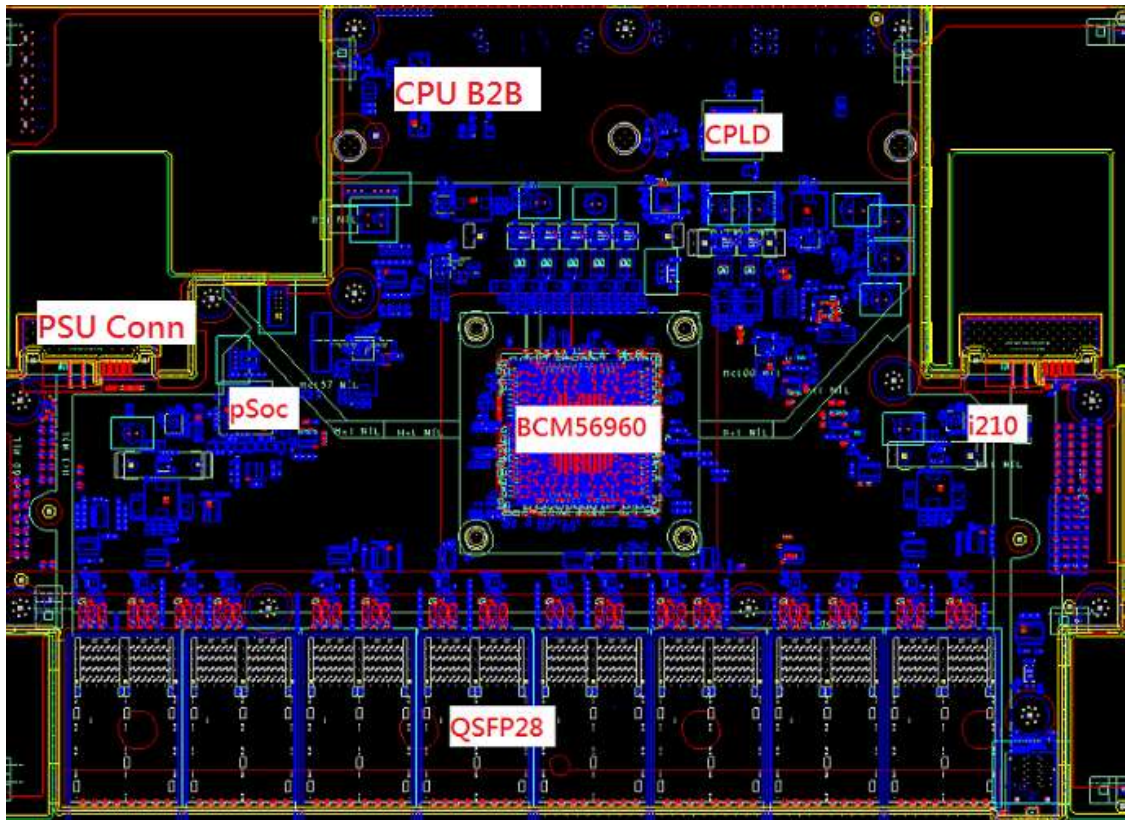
Inventec DCS7032Q28 Switch PCB Top View With Major Components Highlighted
